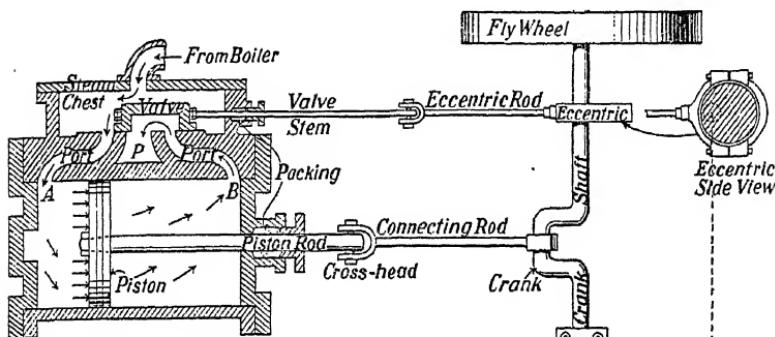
Showing the interior of the cylinder of a steam-engine. Steam entering port A, piston moving to the right.
